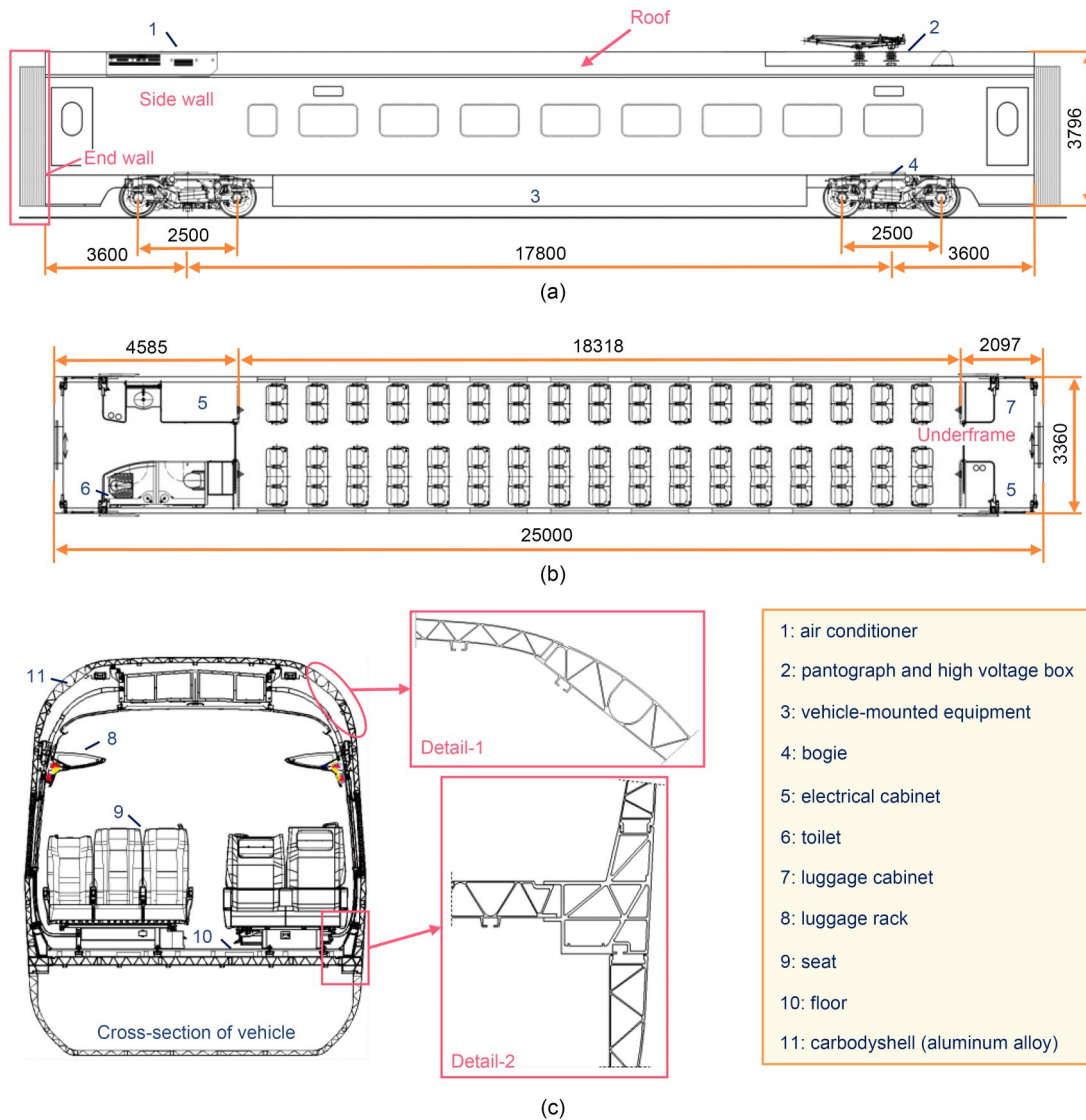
Schematic diagram of an HST trailer carbody: (a) side view of vehicle (unit: mm); (b) interior layout of carriage (unit: mm); (c) cross-section and structural details
